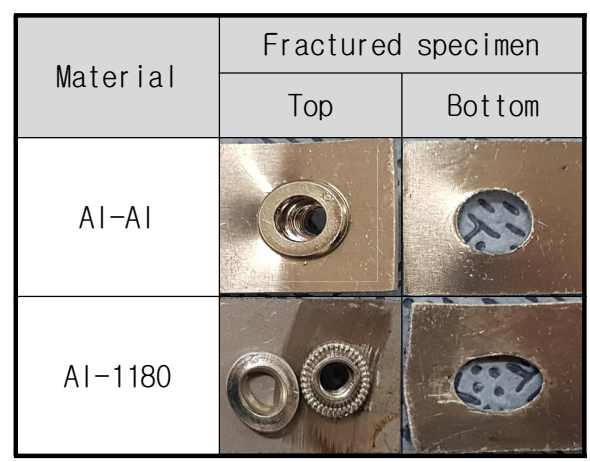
Fractured specimen of FDS joints after tensile shear test
